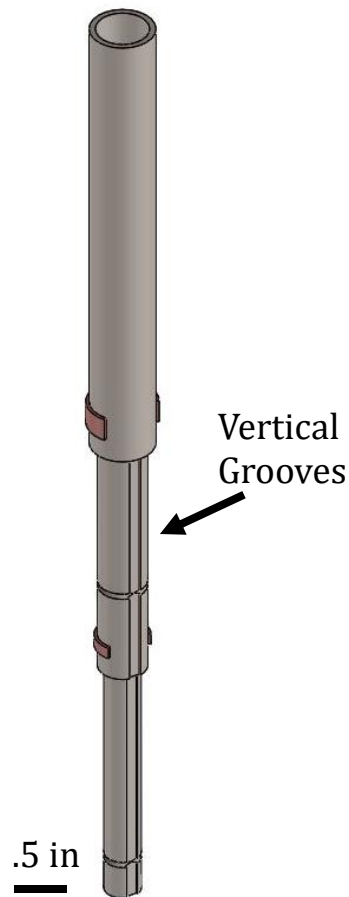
Cross-Section Component View of Compact Telescoping Sample Manipulator Design
